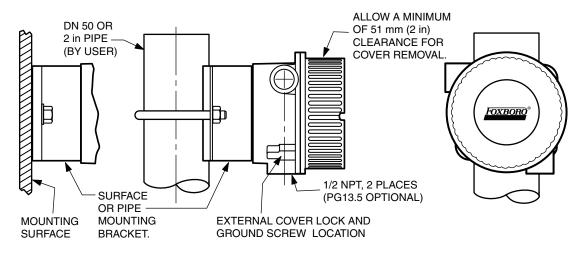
Surface or Pipe Mount with Remote Sensor (Housing Codes S and T)
